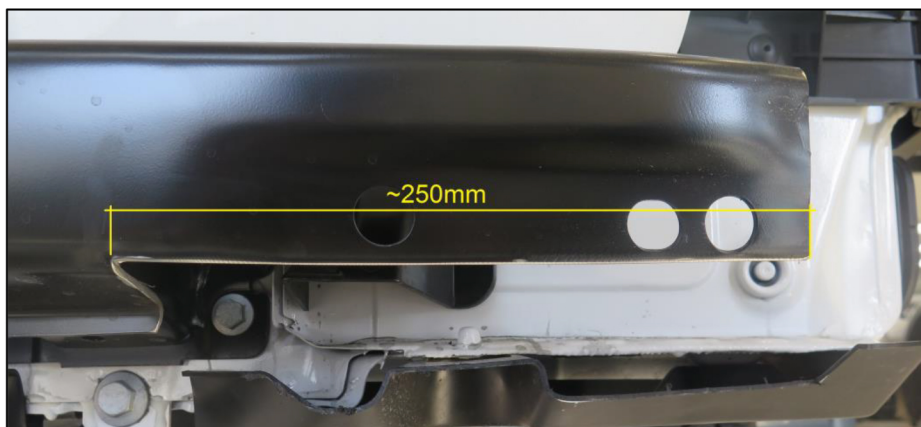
Completely processed impact beam (right side shown, left side mirror image)
